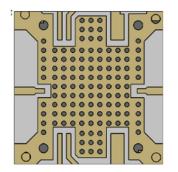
Mounting detail for the TGA2307-SM EVB PCB.
